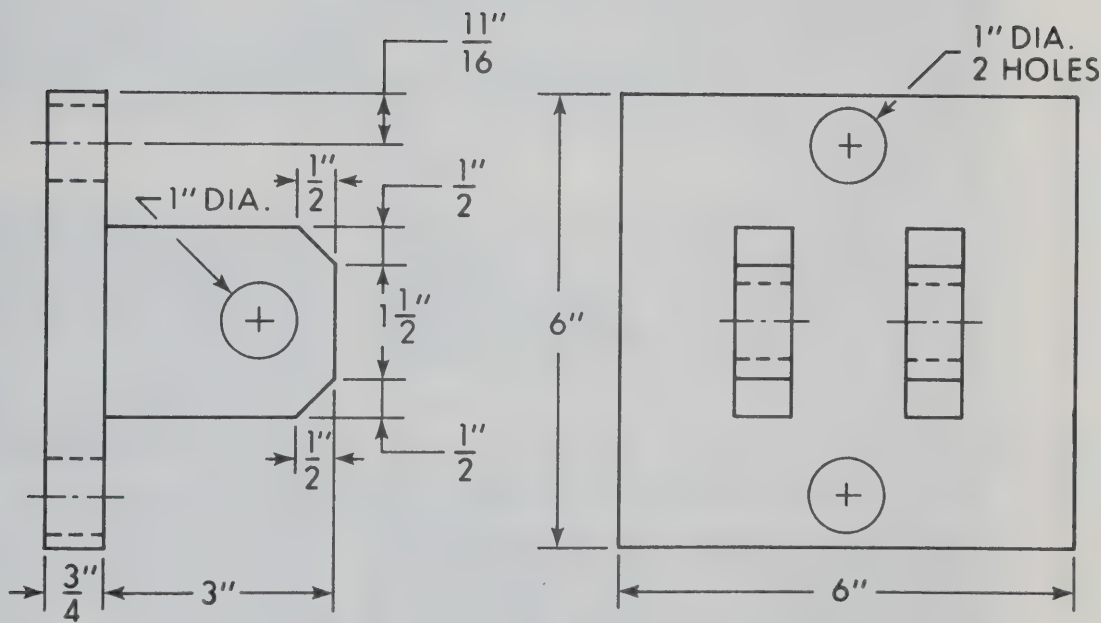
CLEVICE TO TRANSFER HORIZONTAL JACK LOAD
